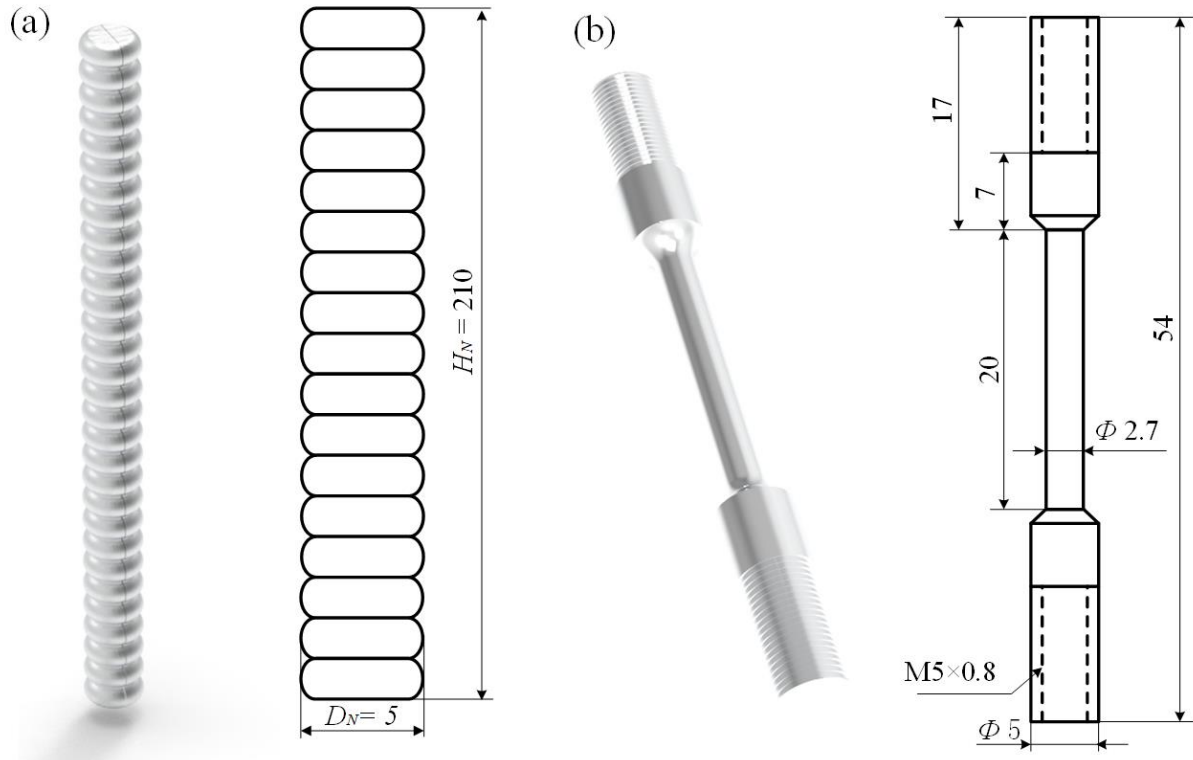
Tensile test specimens: (a) specimen dimensions for as-deposited strut (H_N is the nominal height, D_N is the nominal diameter), (b) specimen dimensions for machined strut.
